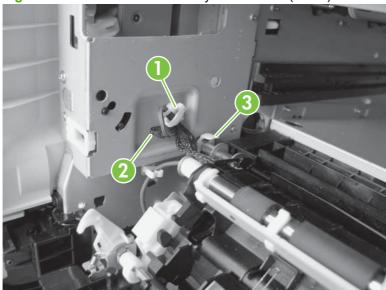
Remove the secondary transfer unit (4 of 9)
